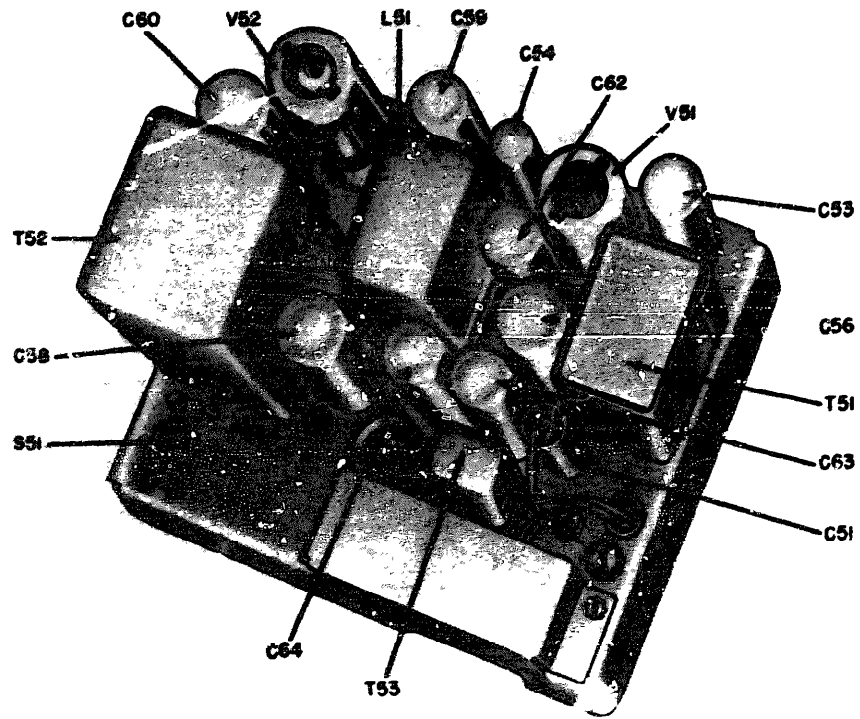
Transmitting or receiving amplifier plug-in assembly, top view, circuit element location diagram.
